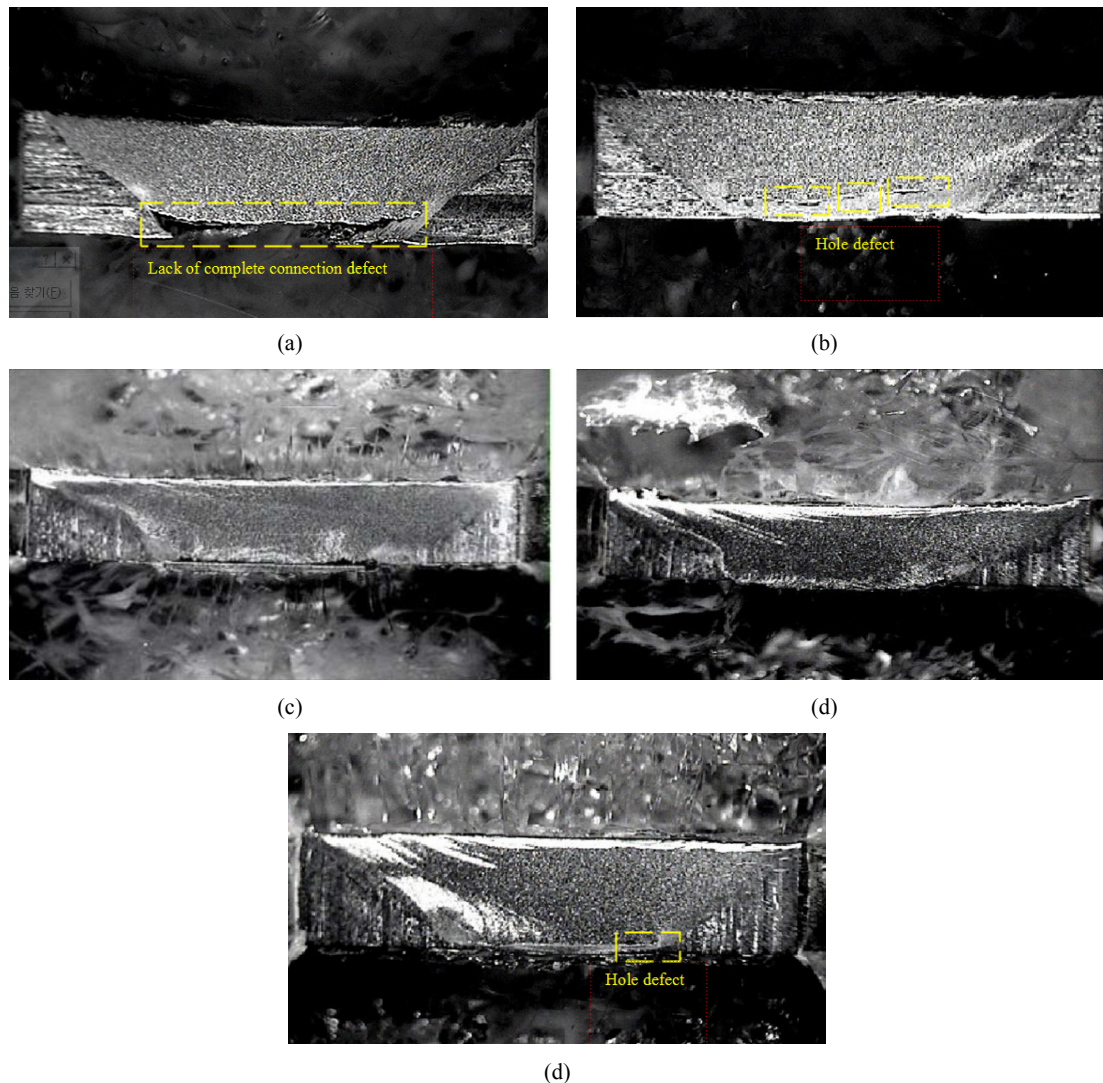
Macroscopic image of the welded cross-sections, (a) sample 1, (b) sample 2, (c) sample 3, (d) sample 4, (e) sample 5
